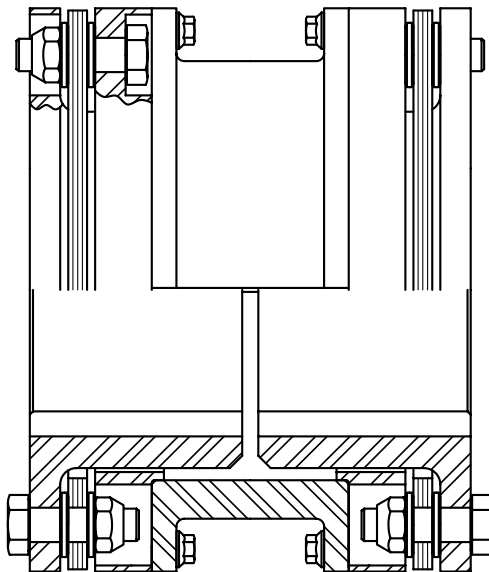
Metal disk coupling with flanged, tubular spacer (Thomas Coupling Div/Rexnord)
